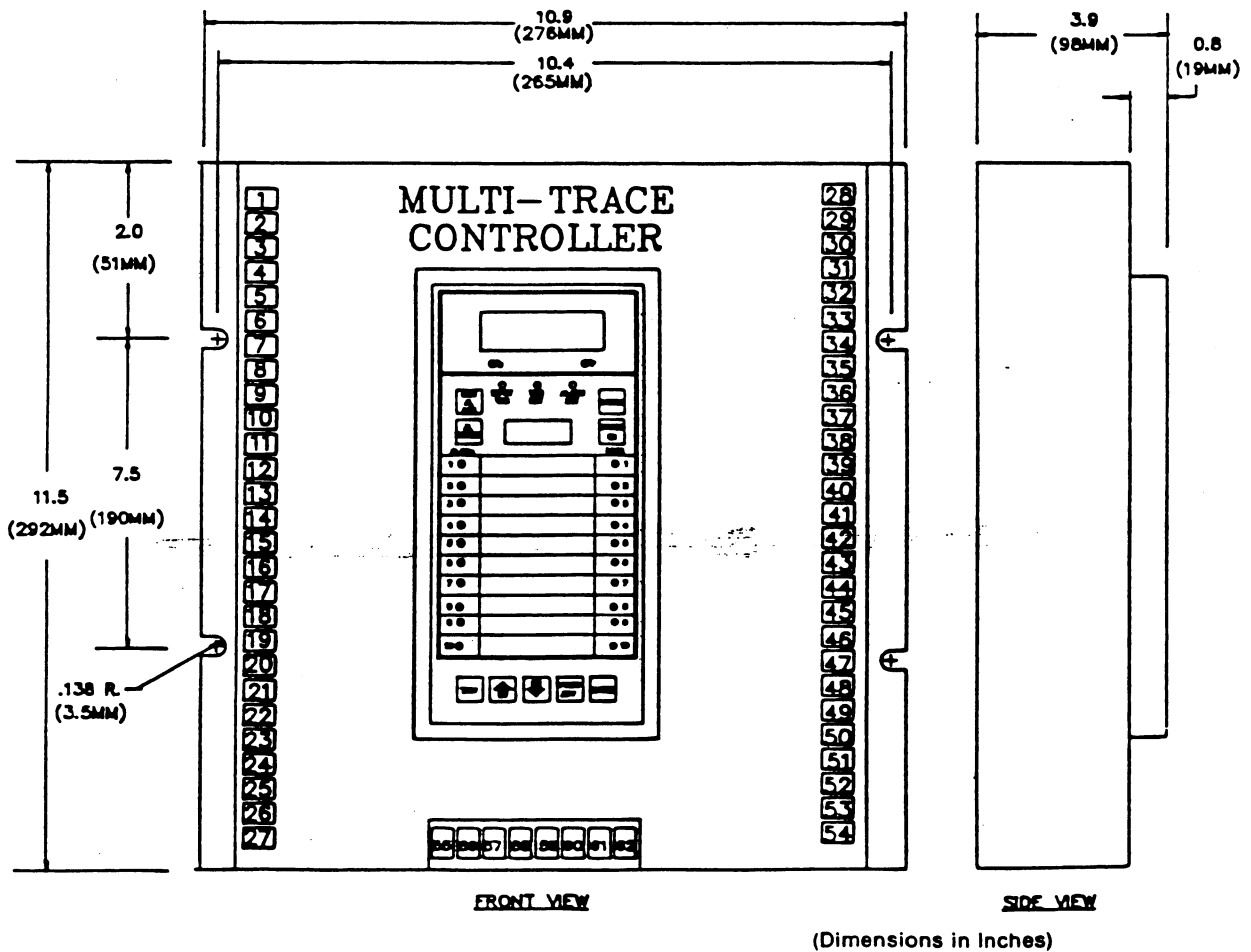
SUBPANEL MOUNTING DIMENSIONS
